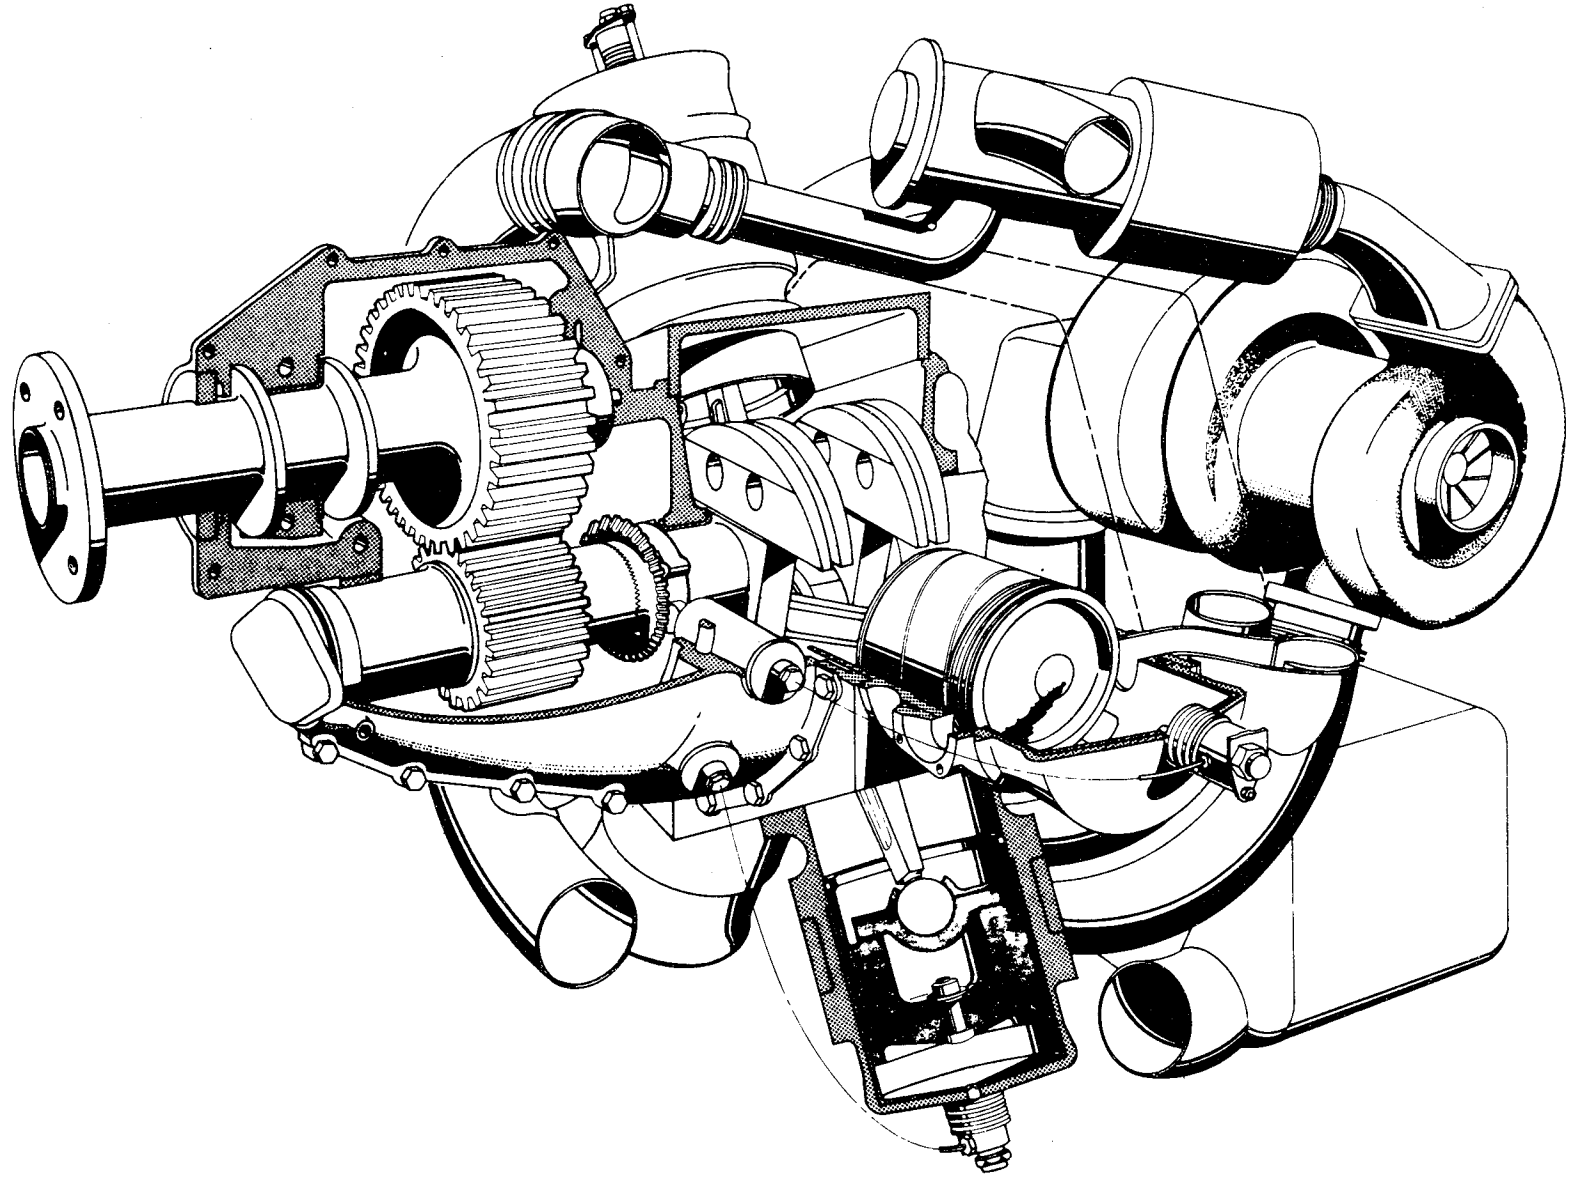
298 KW DIESEL AIRCRAFT ENGINE
